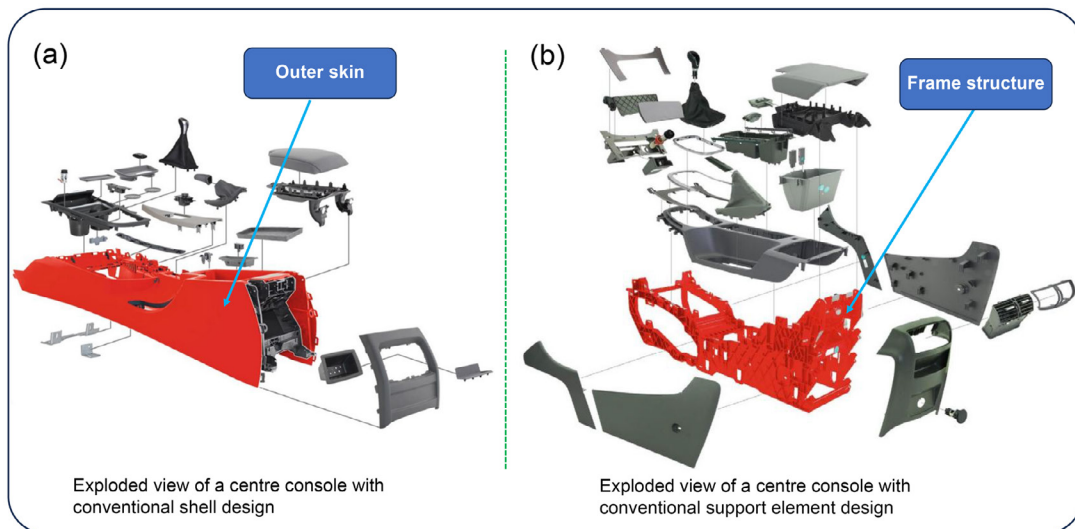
Exploded view of the center console with conventional structure: (a) the shell itself is outer skin; (b) with a structural component inside [21]
